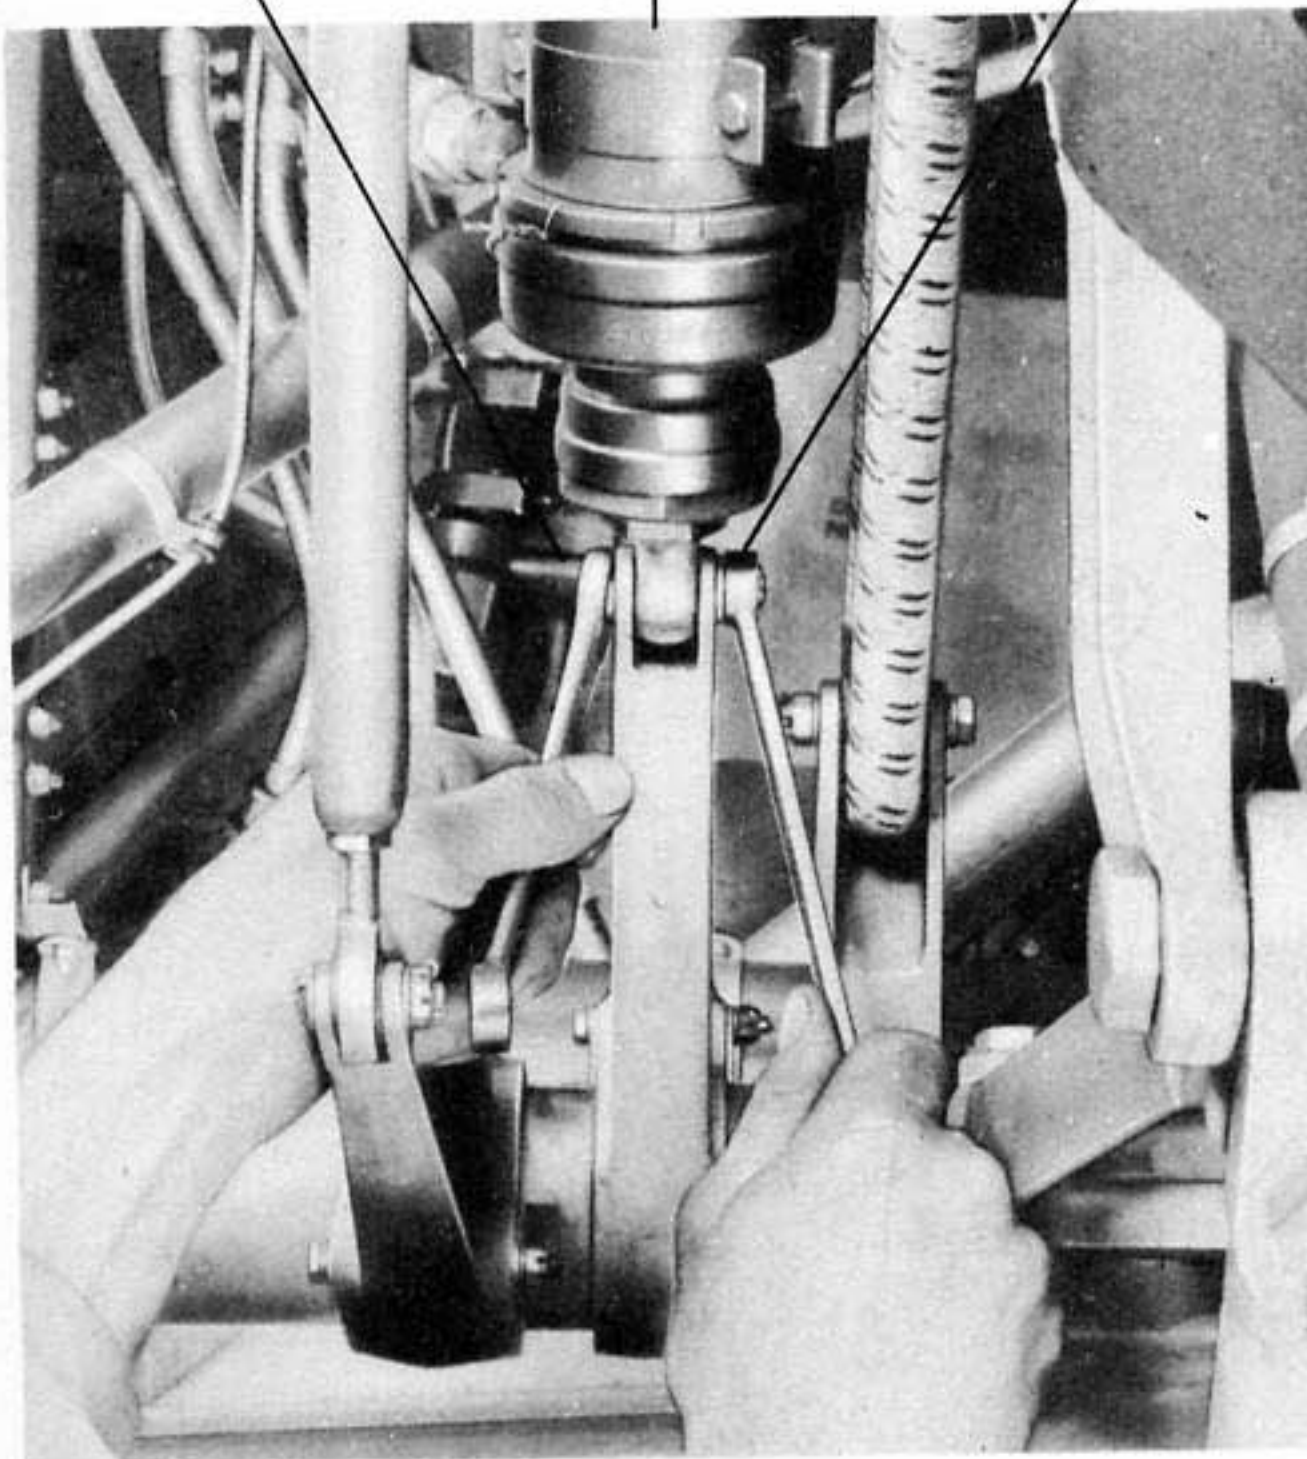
DISCONNECTING ALIGHTING GEAR ACTUATING STRUT AT LOWER END
